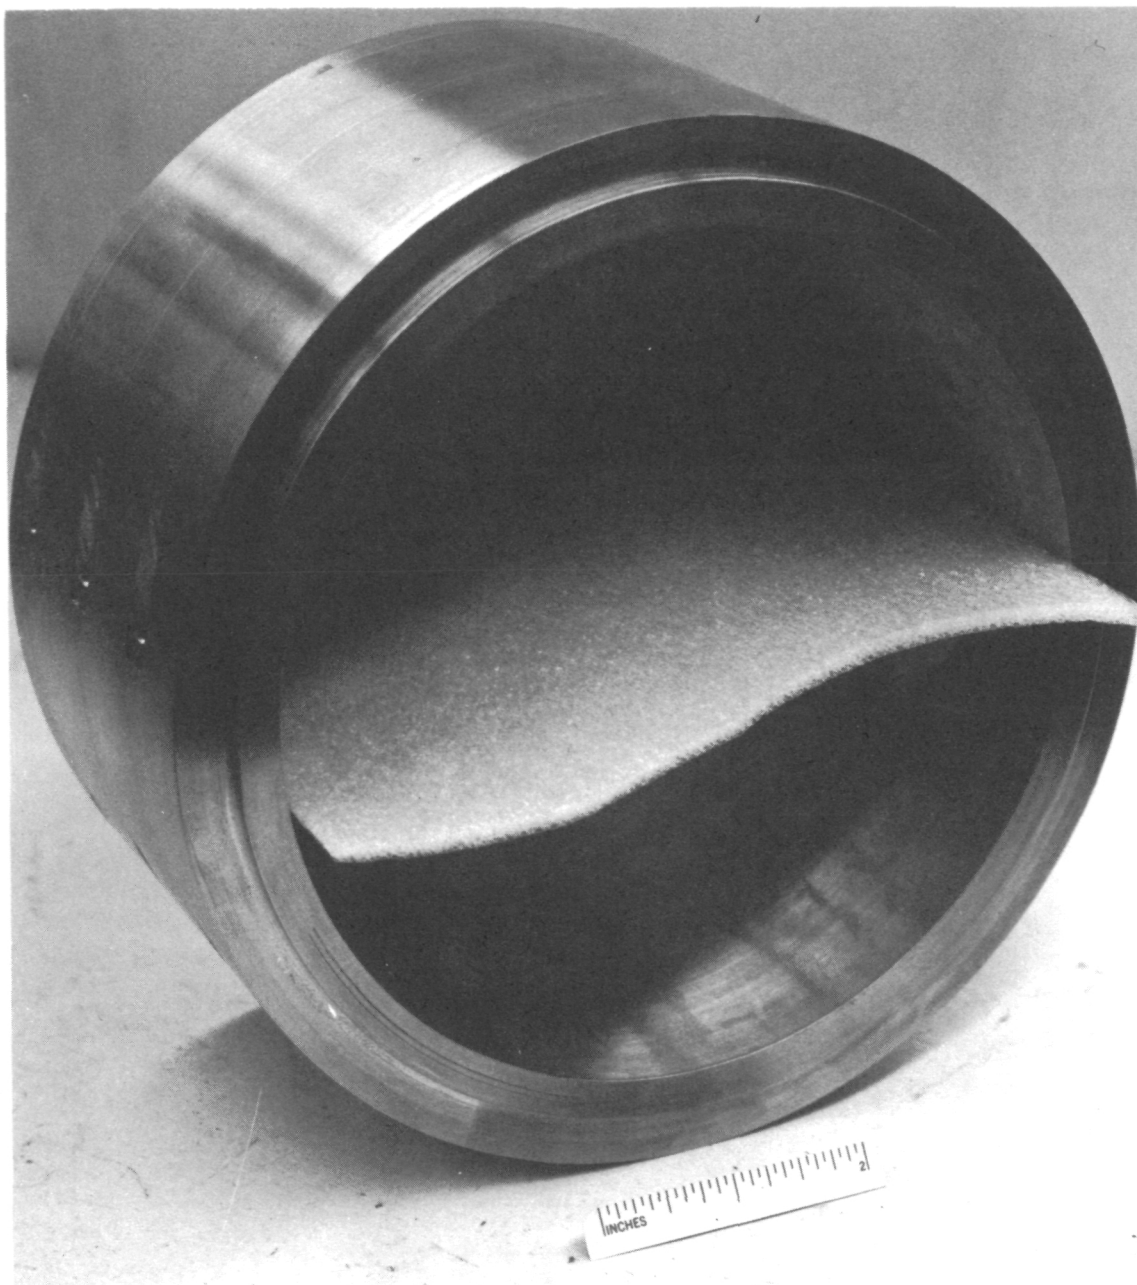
Test Model of Cylindrical Septum Maser Cavity
